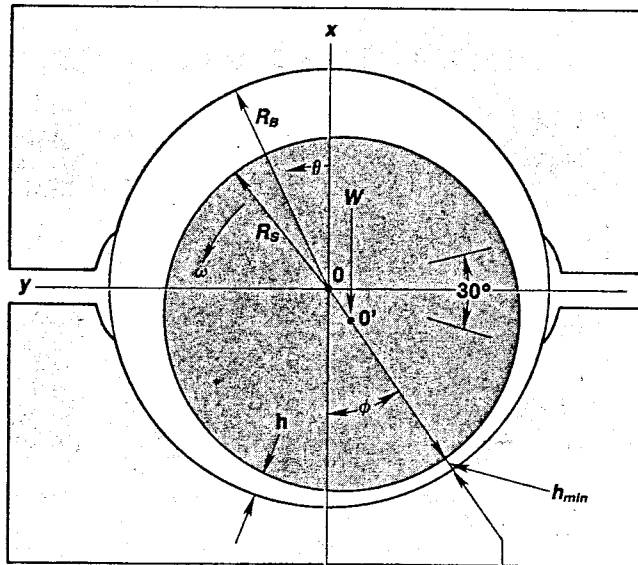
Geometry of split cylindrical journal bearing.
